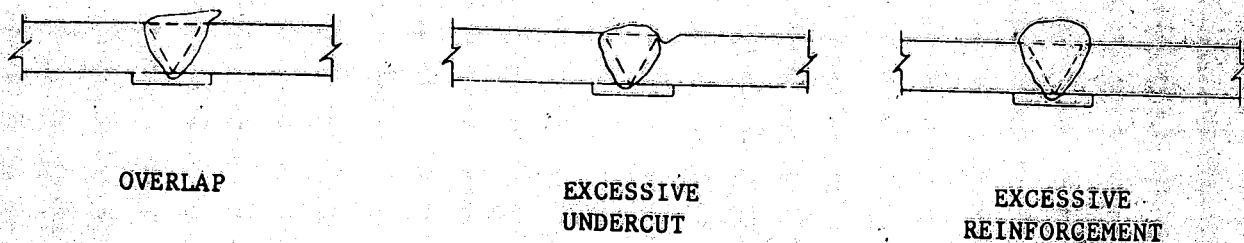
Unacceptable Butt Weld Profiles
